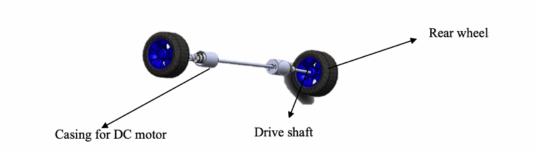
REAR-WHEEL DRIVE CONTROL MECHANISM
